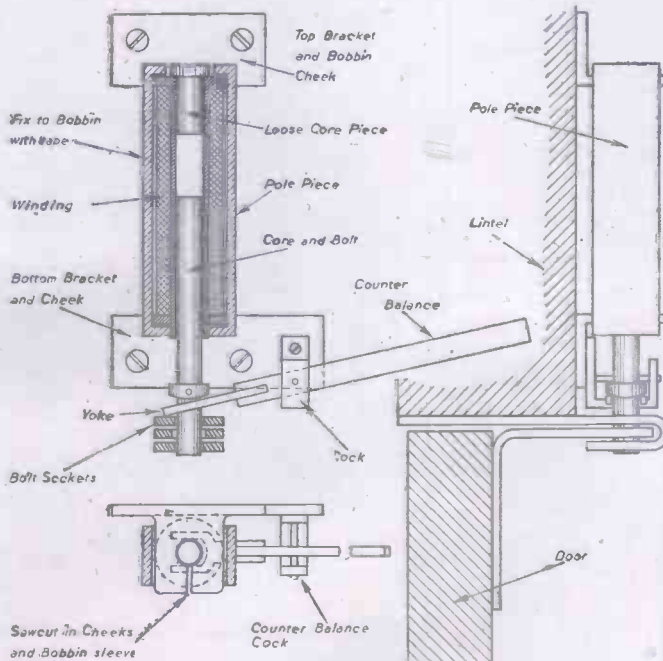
Sectional view and details of the electrically-operated bolt.
